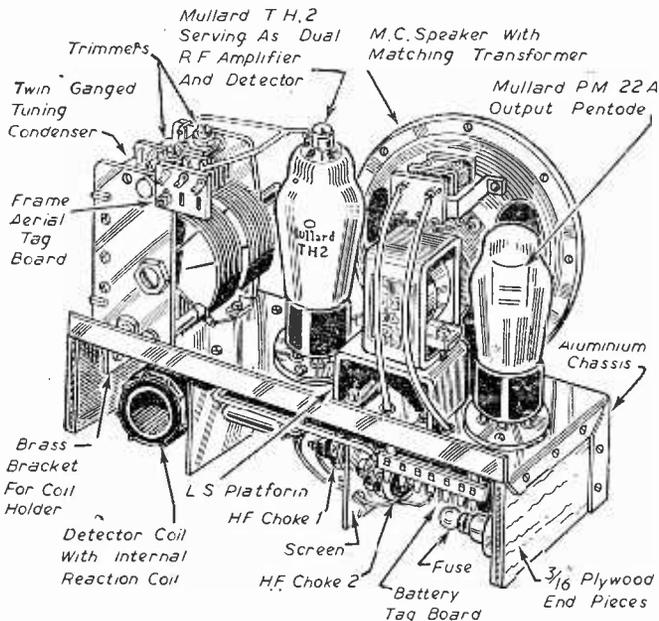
A general view of the completed receiver out of its cabinet, with all main parts identified.
